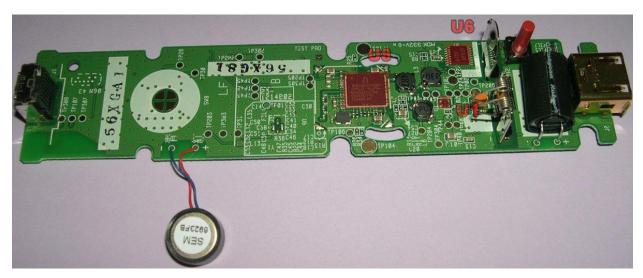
Wii Mote Printed Circuit Board, bottom view.
